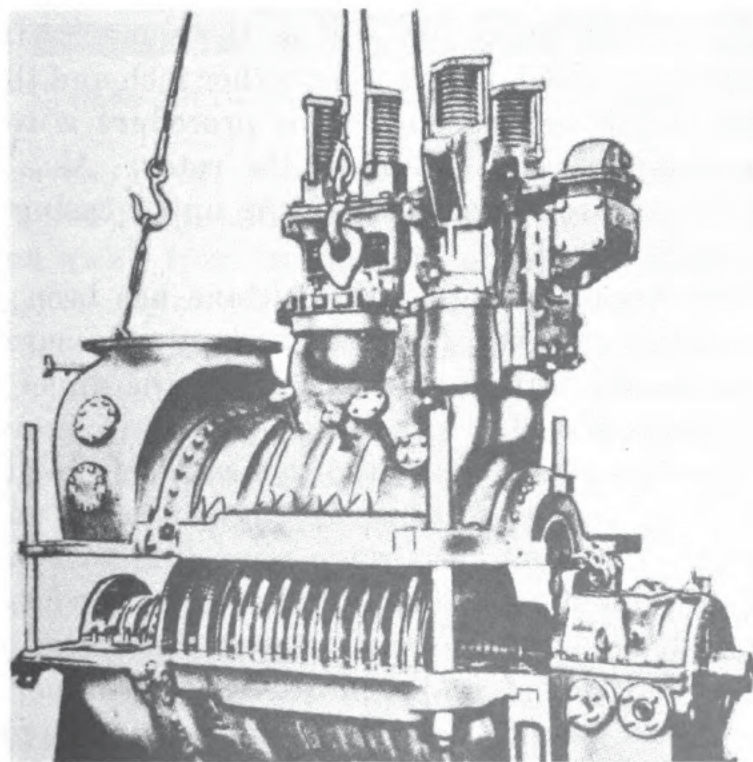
Lifting or lowering upper casing of a high-pressure turbine.
